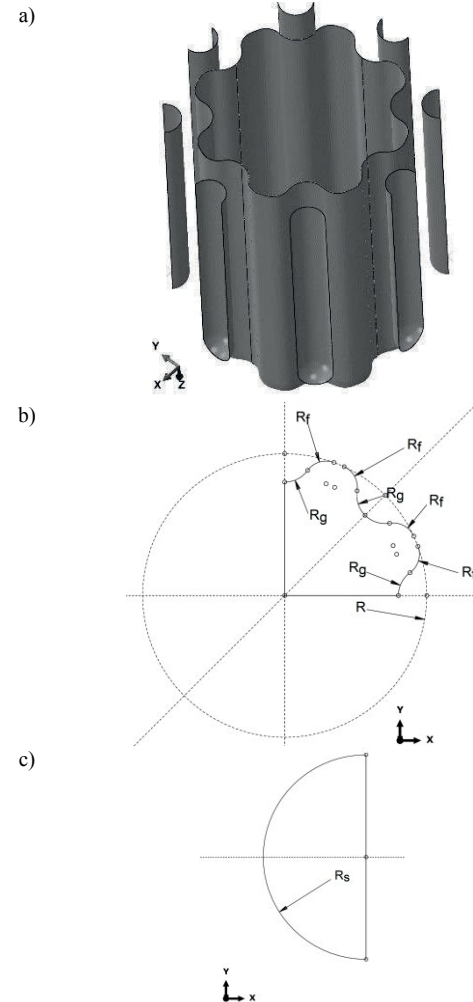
Toolset used in the grooving operation: a) 3D view of the assembly consisting of the grooved die and 8 side punches, b) x-y section of the grooved die, c) x-y section of the side punch
